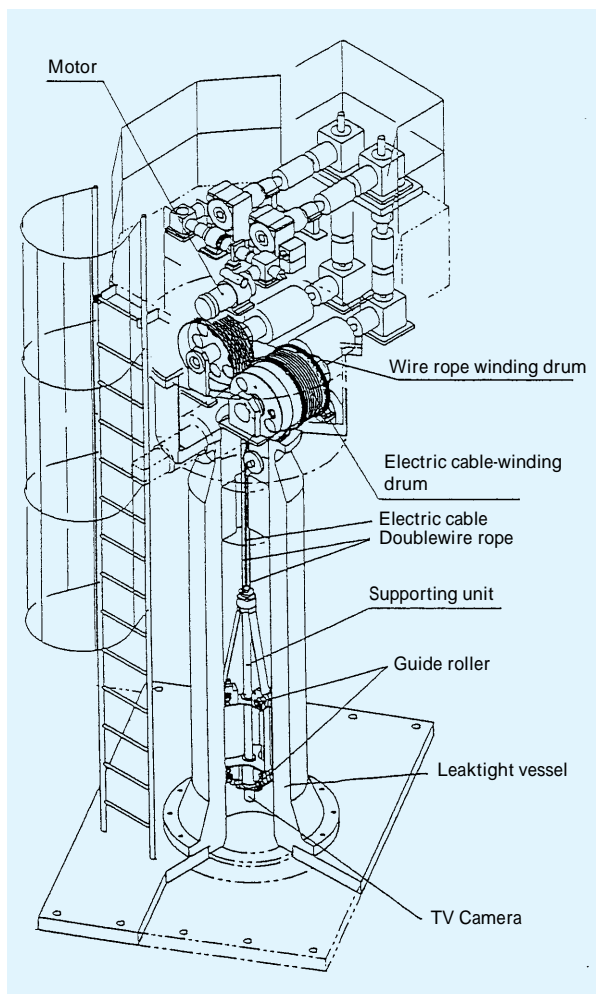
In-service inspection apparatus for core support graphite components.
